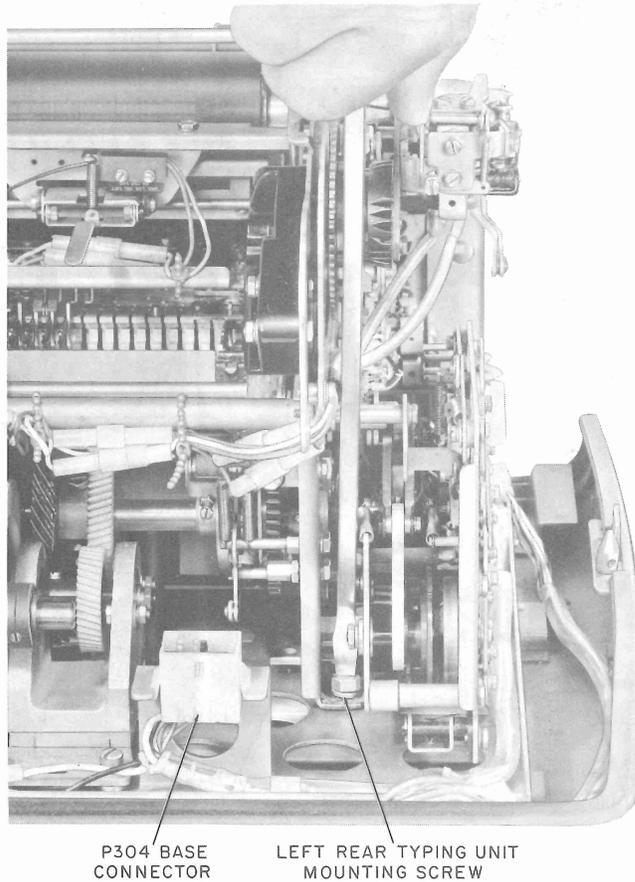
37 Teletypewriter Typing Unit—Left Rear
